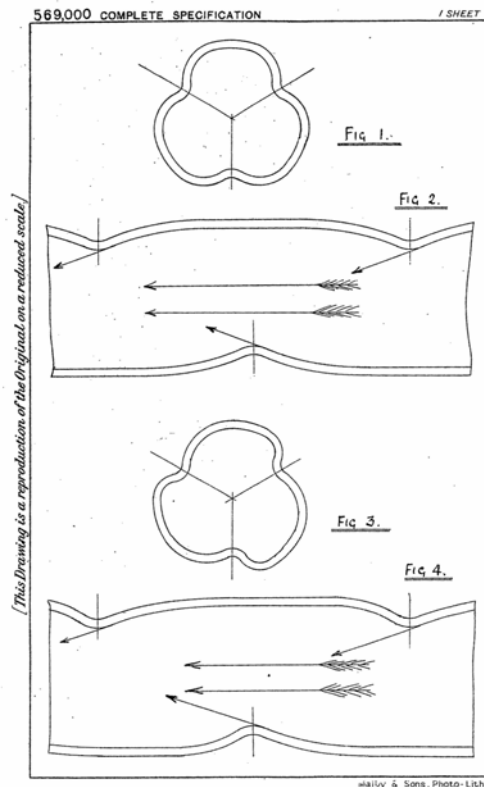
Patented design of a 3-lobed boiler tube by Spanner (1945)
